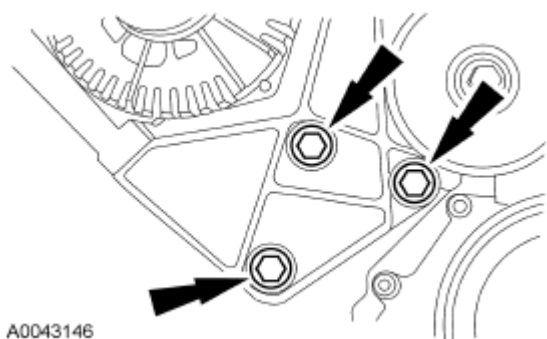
Identifying Generator Mounting Bracket Assembly Bolts
